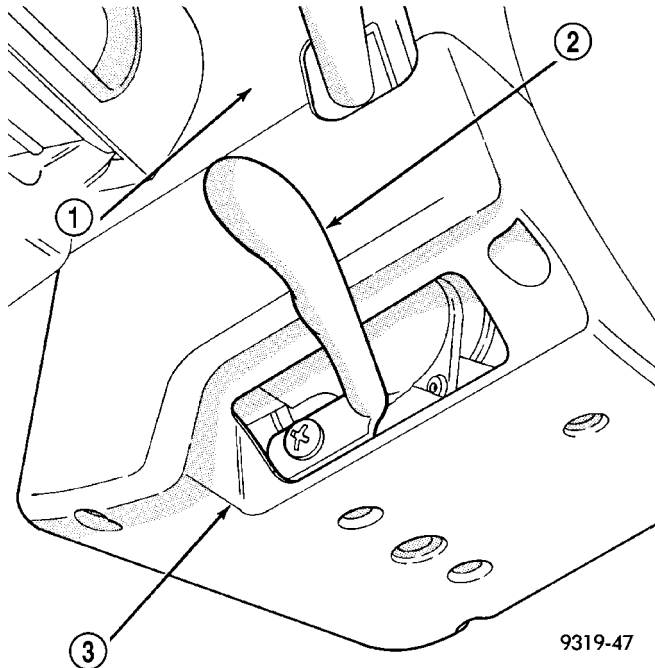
Tilt Lever And Upper And Lower Shrouds
